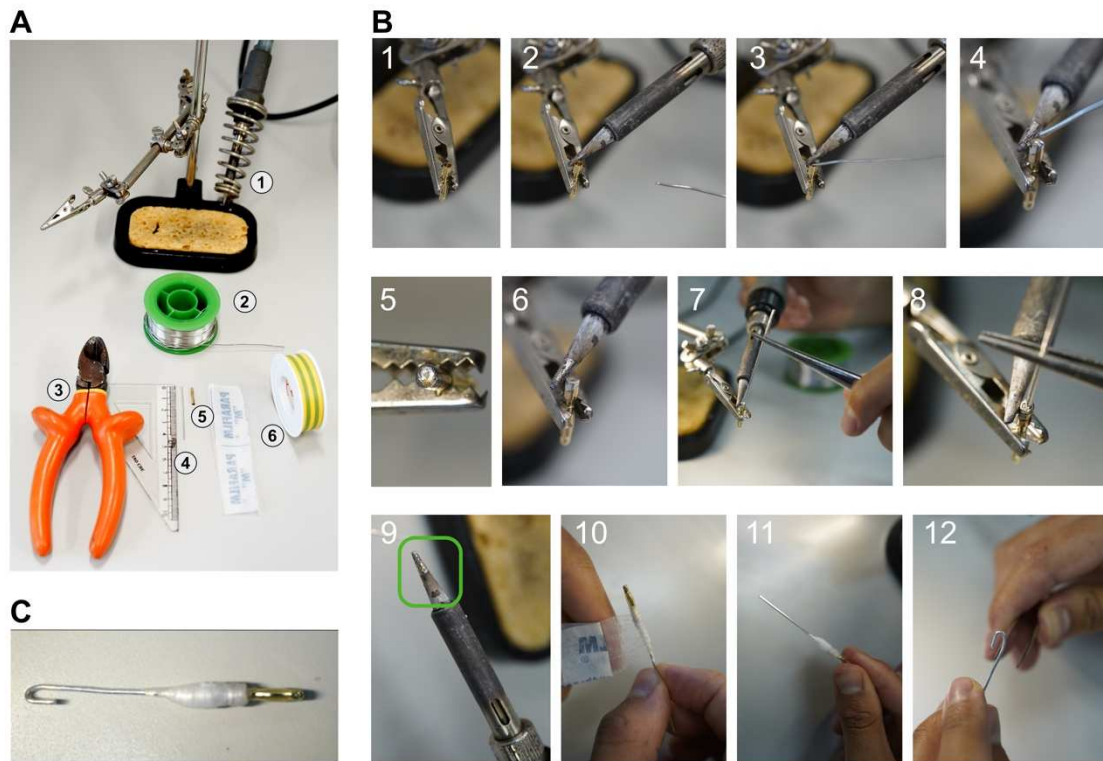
Soldering electrodes for potential recordings. A) Overview of necessary equipment: (1) soldering iron and holding device, (2) solder, (3) pliers and ruler for cutting the silver wire, (4) silver wire, (5) banana plug, (6) parafilm and insulating tape. B) Step-by-step soldering instructions: 1. Place banana plug in the holder. 2. Heat the banana plug with the soldering iron. 3&4. Fill empty banana plug with the solder. 5. Close-up of filled banana plug. 6. Keep the filled banana plug hot to add the silver wire. 7&8. Add the silver wire. 9. Maintain the soldering iron by cleaning it with the solder leaving a thin layer of solder on the tip (green rectangle). 10&11. Wrap the connection of the banana plug and the silver wire with parafilm or insulating tape to isolate it. 12. Bend the tip of the electrode with a forceps into a hook. C) Finished electrode.
